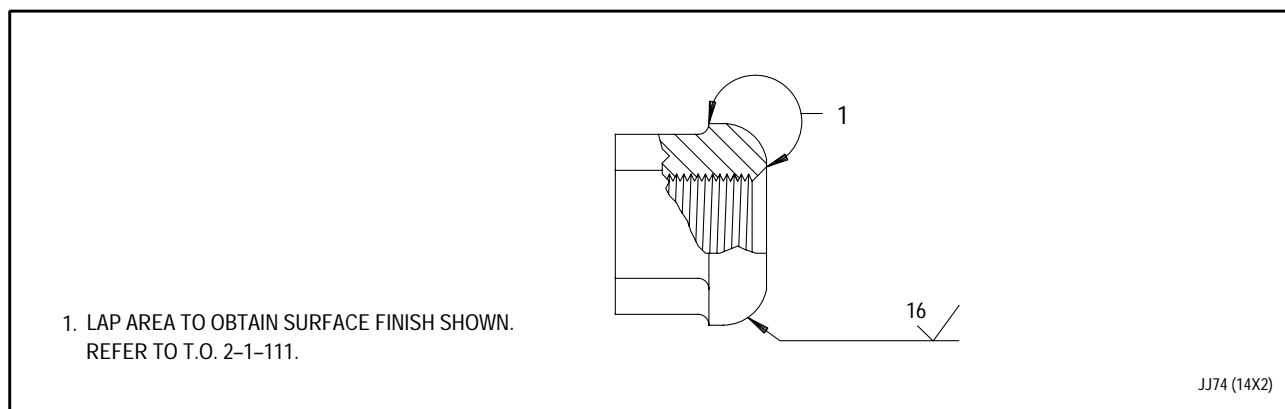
No. 5 Bearing Support Rod Ball-end - Lap Repair
